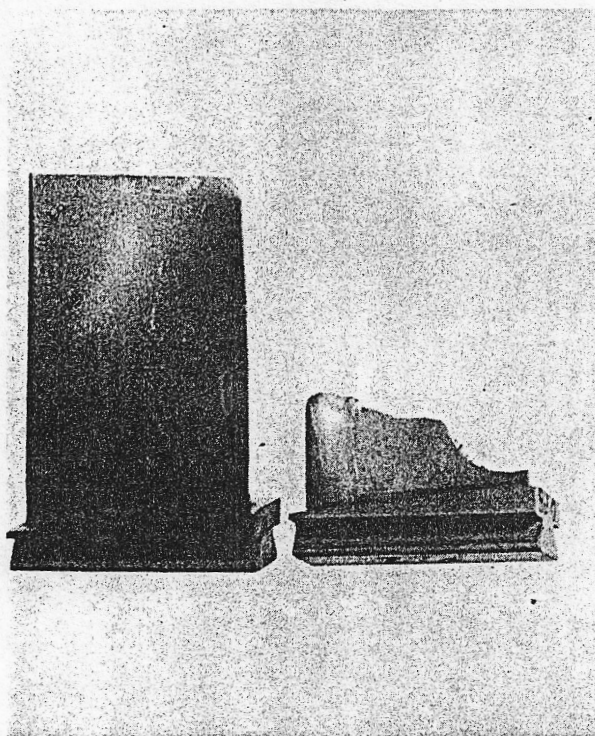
FATIGUE CRACK IN SEVENTH
